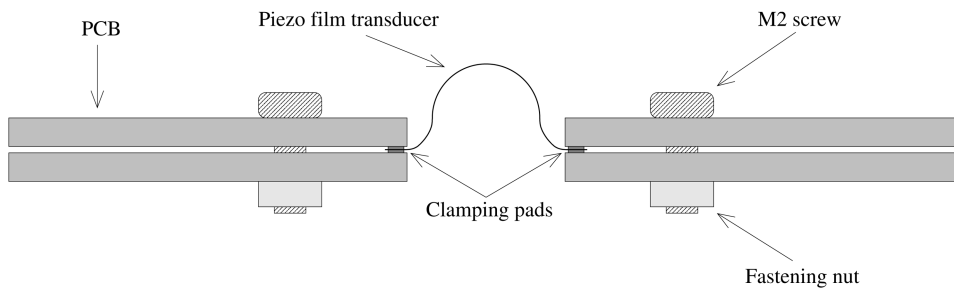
PCB piezo film mounting. The piezo film element is clamped between conductive pads on two pieces of printed circuit board.
